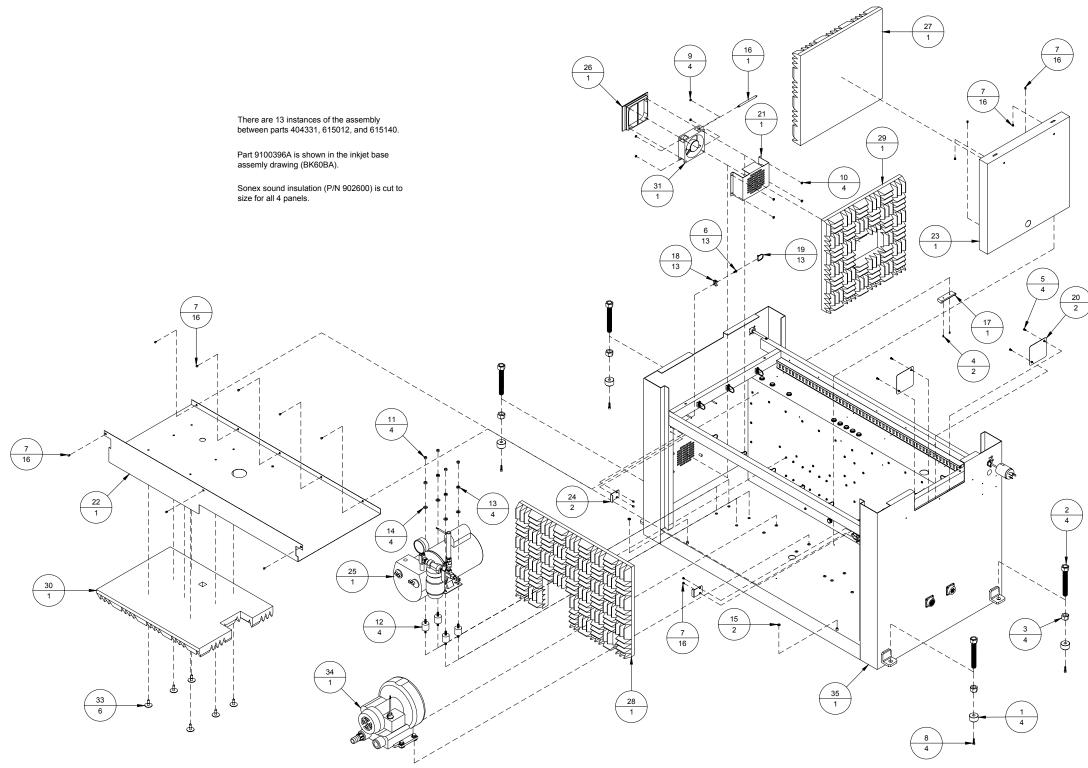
Electrical Box Assembly, BK6OB (9102444A)
